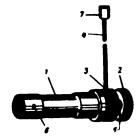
Fixture for Checking Backlash of Accessory Drive Bevel Gears
